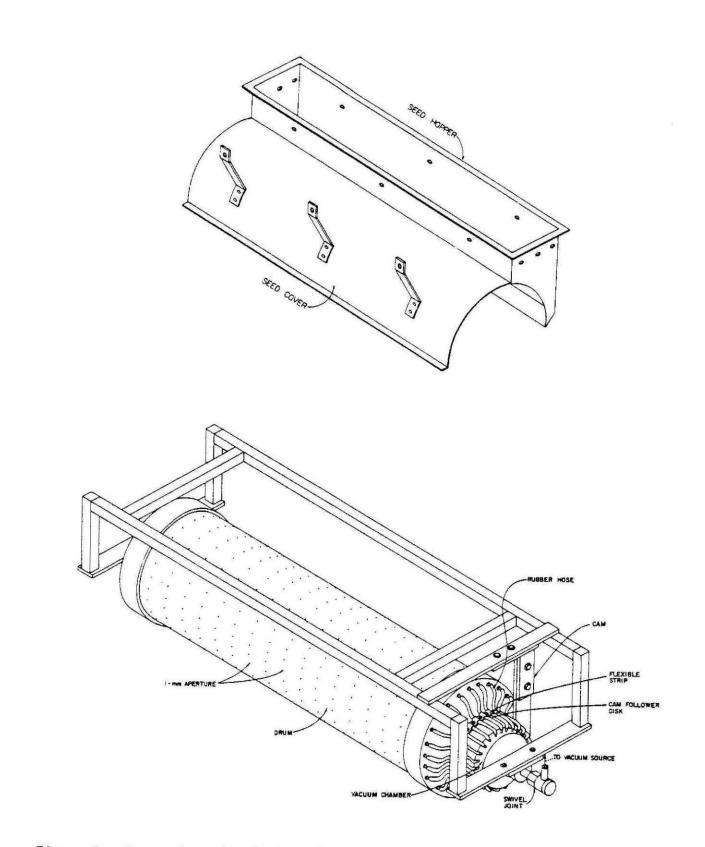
Three dimensional view of the vacuum drum seeder showing detailed design of the seed hopper (top) and vacuum chamber, cam mounting, rubber hose attachment, and drum seeder.
